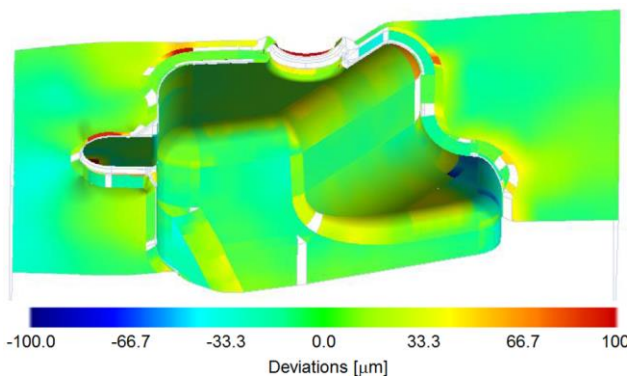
Scanned surface errors on the real workpiece finished with the optimized interpolator setting. The colored areas are within the surface profile tolerance range of ± 0.1 mm.
